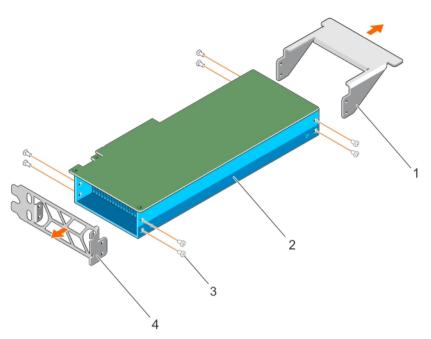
Removing the GPU Intel I/O brackets and the support brackets
